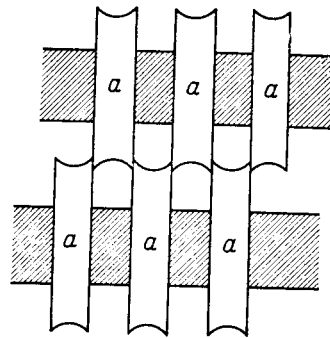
A design for rollers cutting lengthwise, according to Vennin *et al.* [13]; a—cutting knives.
